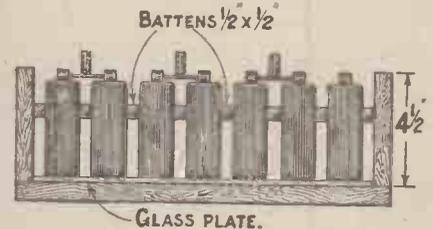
This drawing shows the case with one side removed to illustrate the position of the units and of the separating battens.
